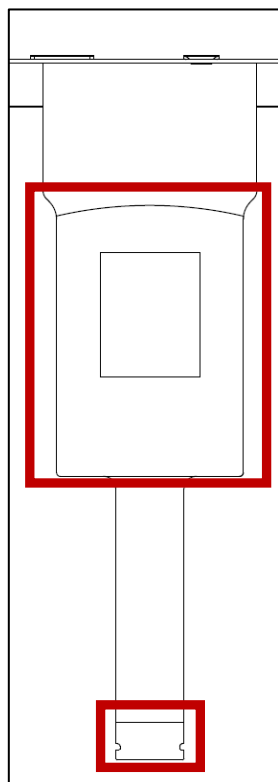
Close-up View FPC Stiffener Areas (Shown from Rear View of Touch Panel Module)
